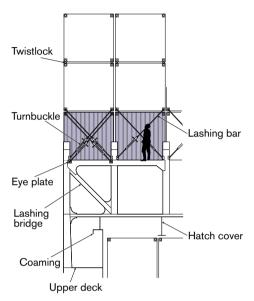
Typical post-Panamax lashing bridge arrangement (shown 4-high).
